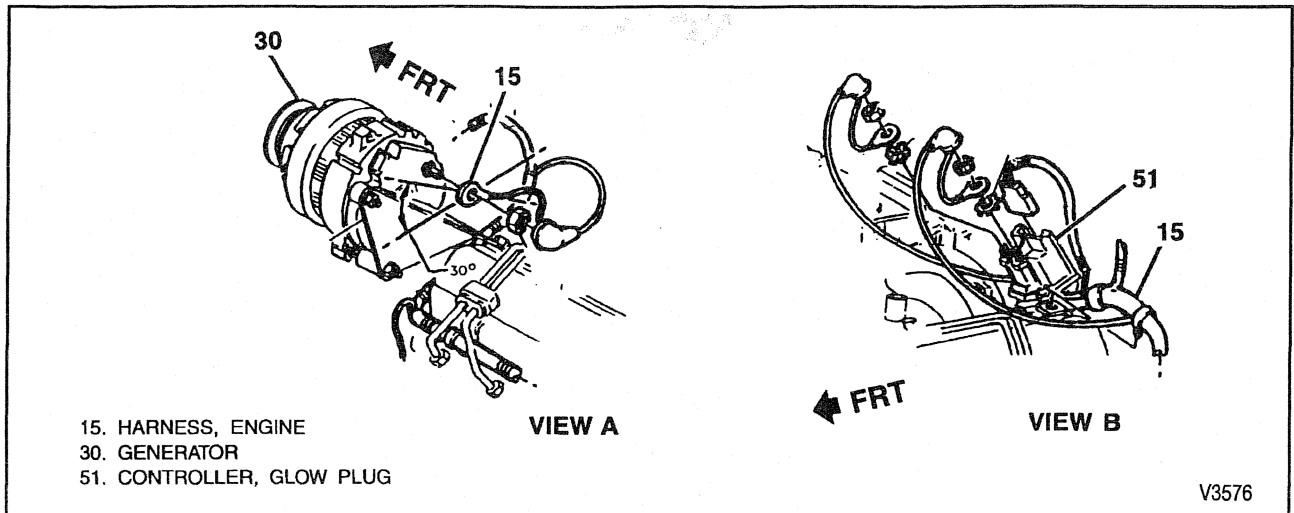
Engine Wiring - Left Side Views (6.5L Diesel Engines)
